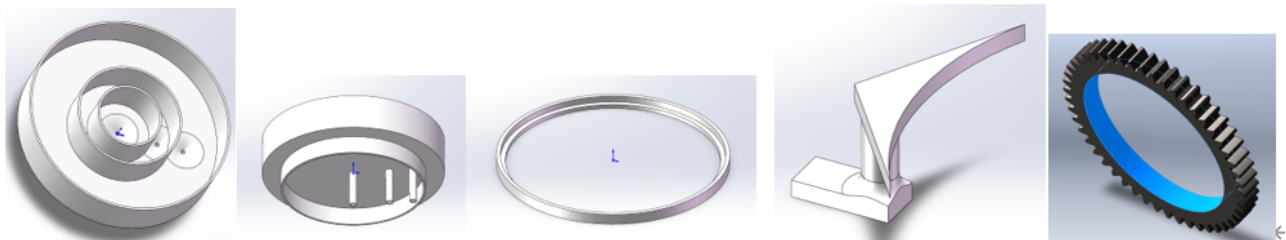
Brewing Nozzle (from top & bottom), Nozzle Holder, Holder Support, Spur Gear Ring
